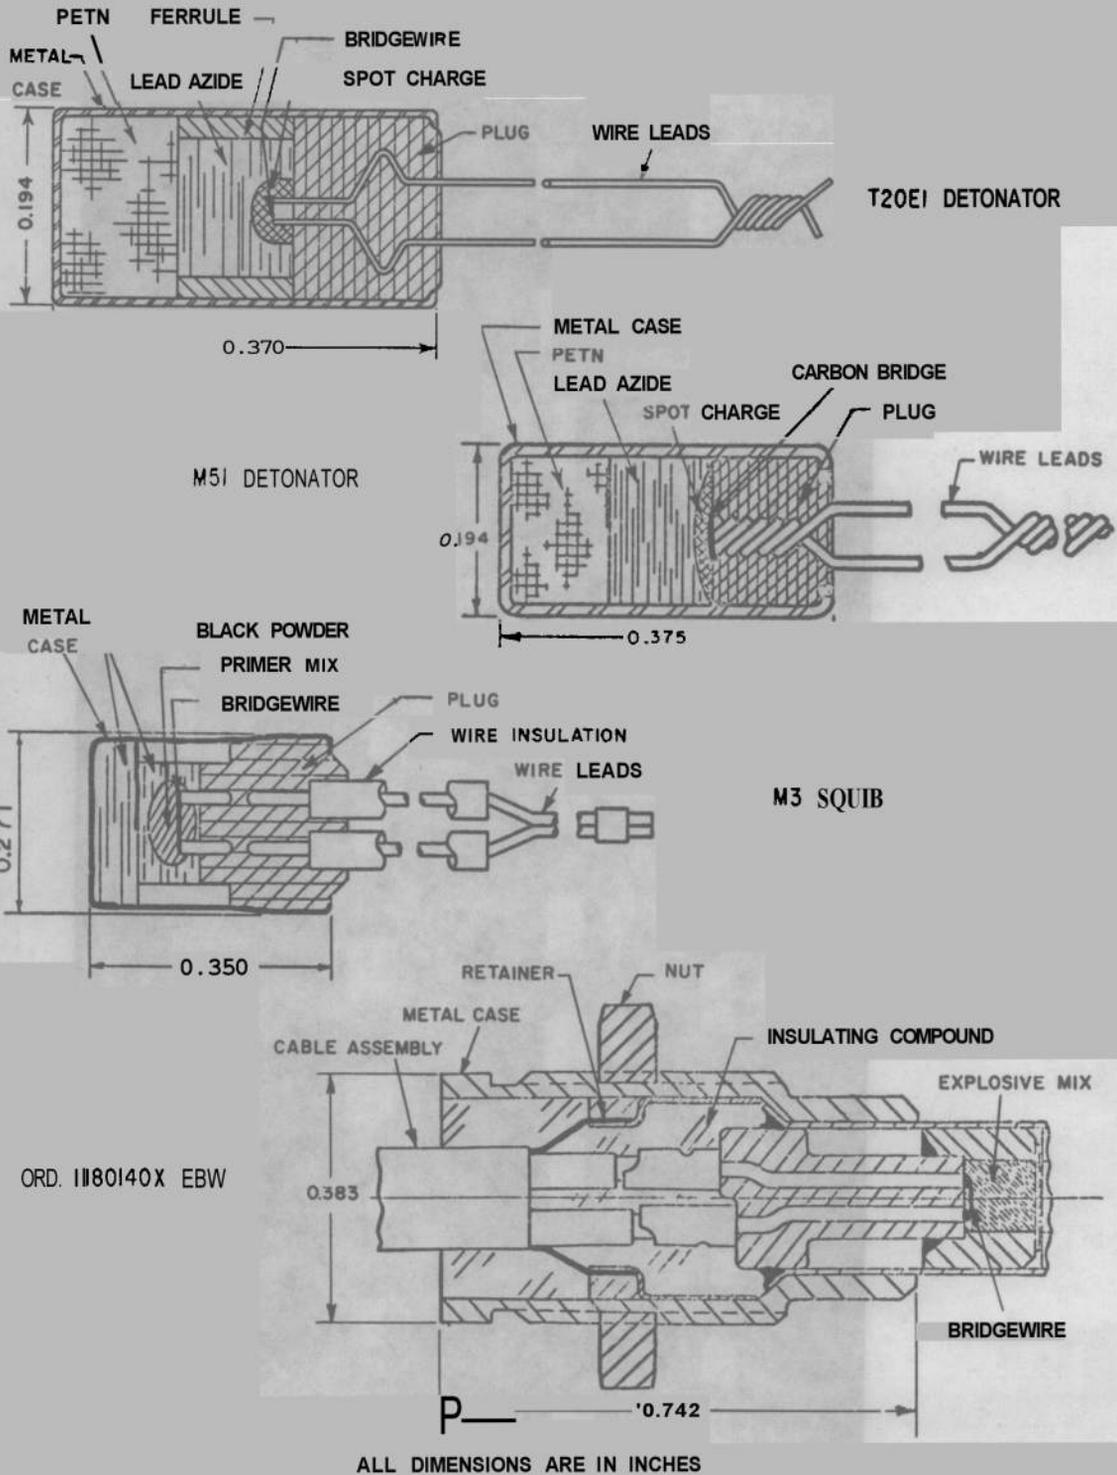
Drawings Showing Construction of Typical EED's Used in Army Missiles
